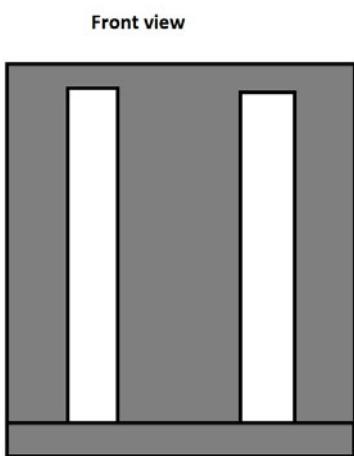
, FRONT VIEW (WITH THE SLITS FOR THE GEARS)
